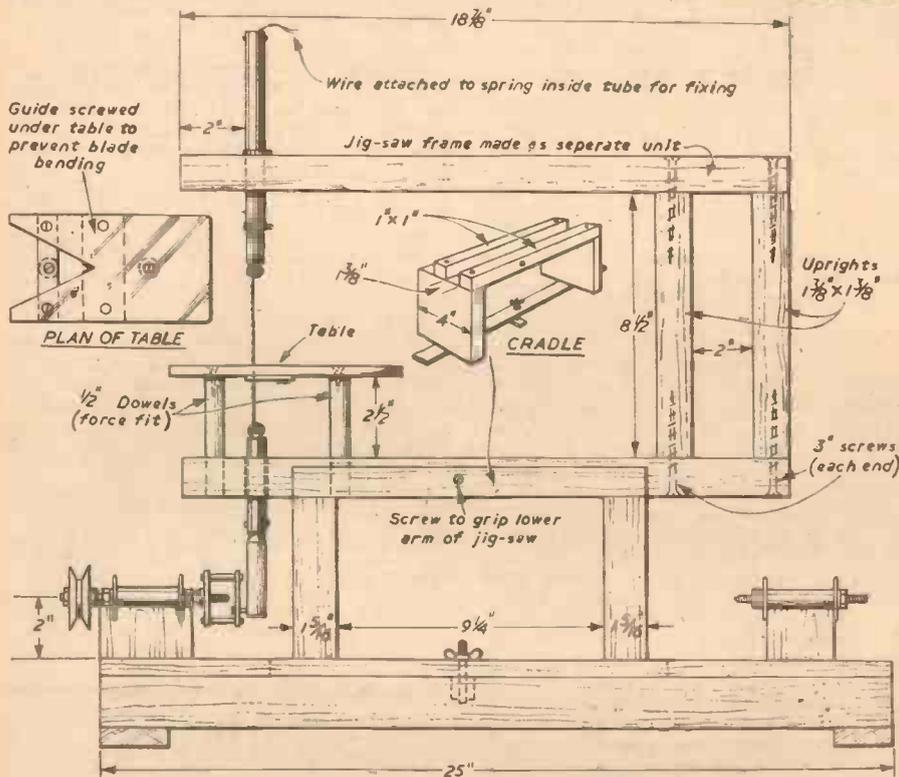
General arrangement of the jig-saw and details of the modified lathe.
